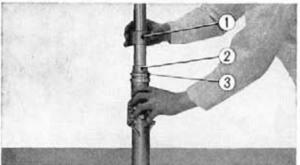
① Oil seal driving weight ② Oil seal driving guide ③ Oil seal
